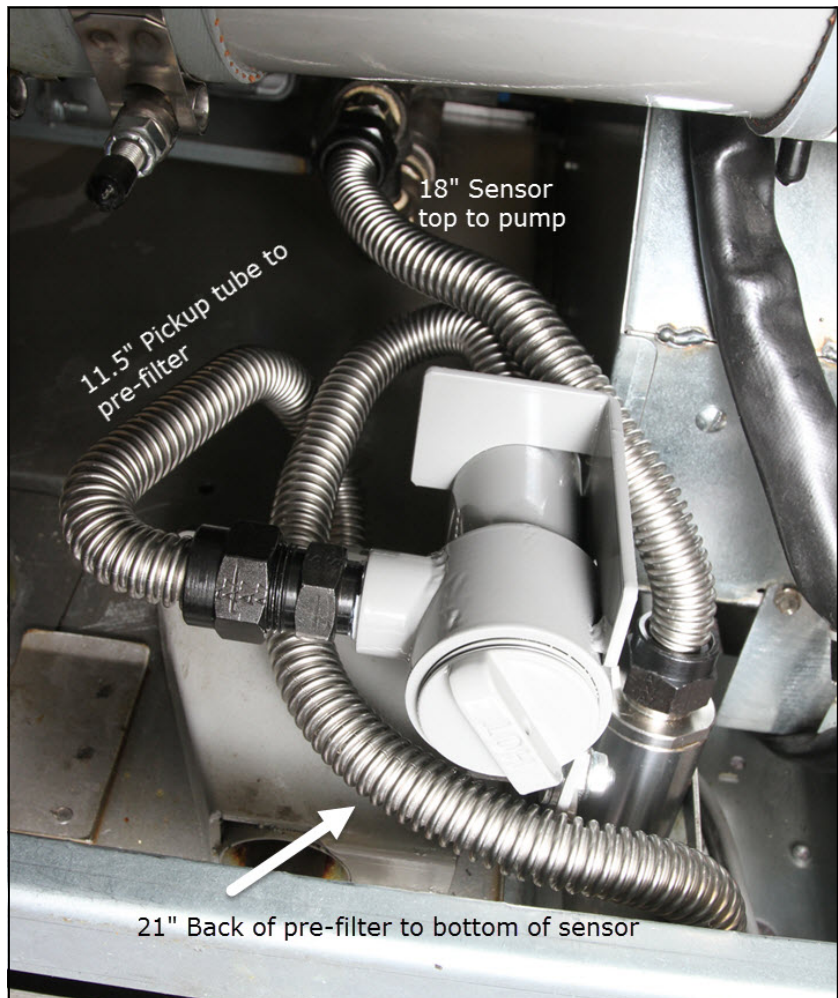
The sensor is mounted using existing threaded holes in the channel. In some configurations, a caster is positioned here and its mounting bolts must be removed and replaced with the provided longer bolts to allow positioning of the sensor assembly on the caster mounting flange.
